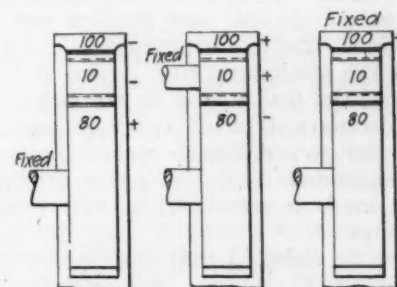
AN EPICYCLIC GEAR DESIGNED TO FORM PART OF A REAR-AXLE SPUR-TYPE DIFFERENTIAL
